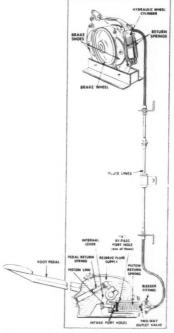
COMPONENT PARTS of a typical, simple hydraulic brake system showing master cylinder assembly in cross-section.
